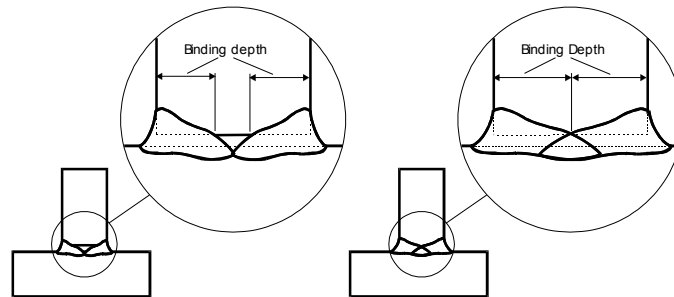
The welded flange joint at the left hand side has a lack of fusion between the weld joints. The flange joint at the right hand side has full fusion between the workpieces.
